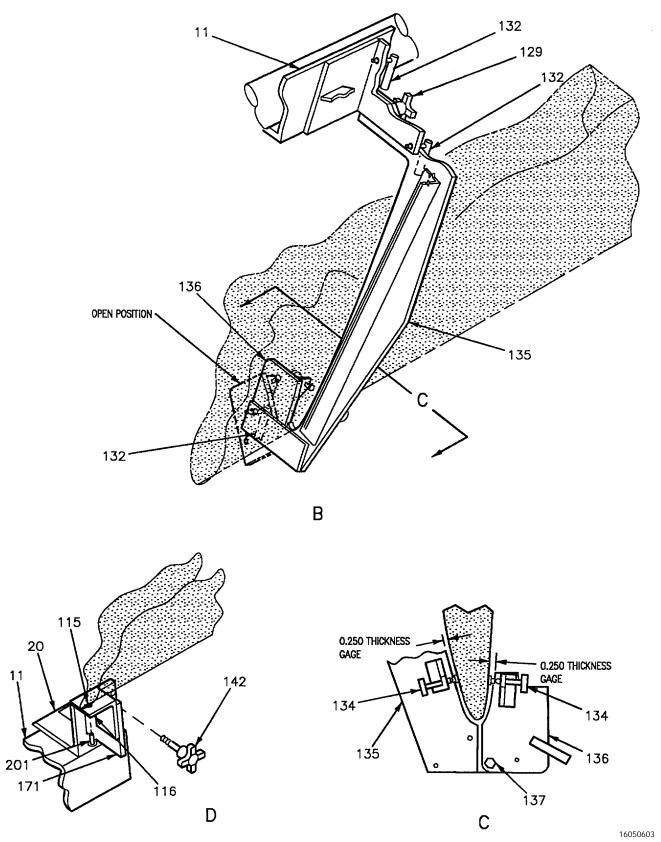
Alignment and Drilling for Rigging Rivet (Sheet 3)
